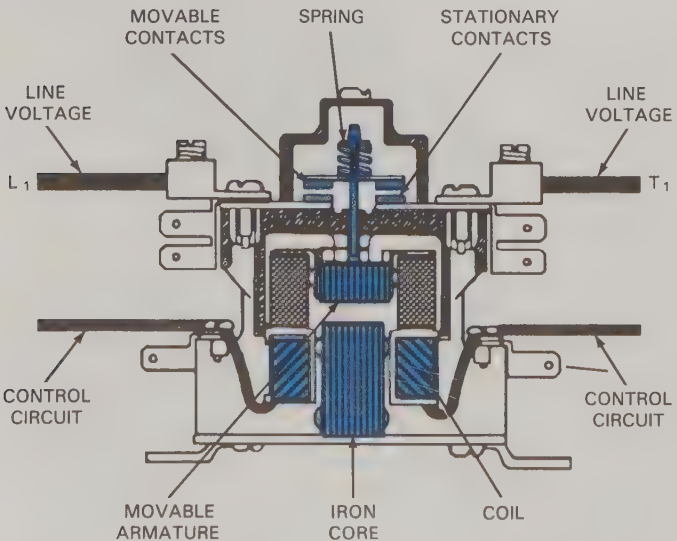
Cutaway view of a contactor. Spring pressure holds contacts apart until the coil is energized and snaps them closed.
